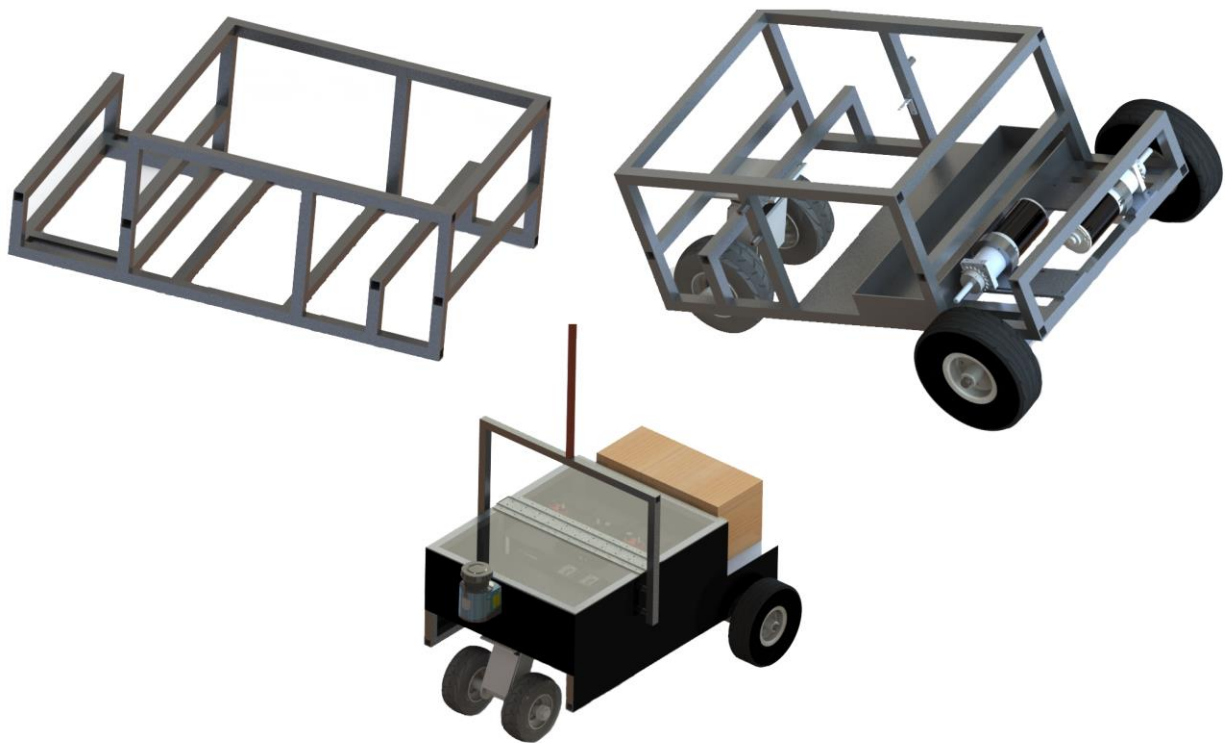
CAD models of the robot chassis, drive system, and fully assembled.
